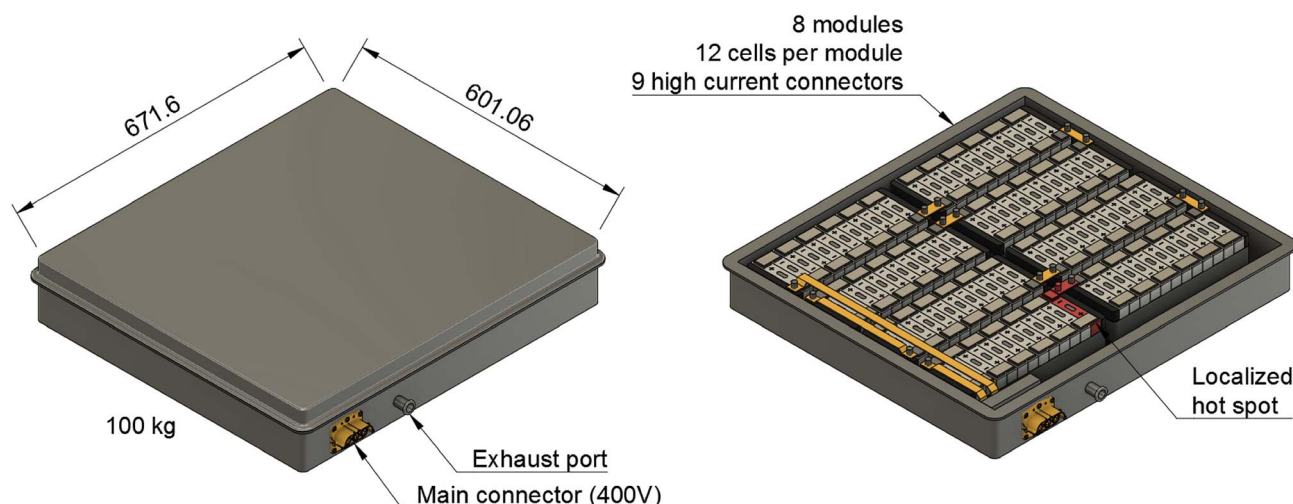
Drawing of a hypothetical PHEV battery-pack to demonstrate the safety issues: (left) including complete casing, (right) with upper part of the casing removed. A possible hot spot is shown in red. Dimensions in mm.
